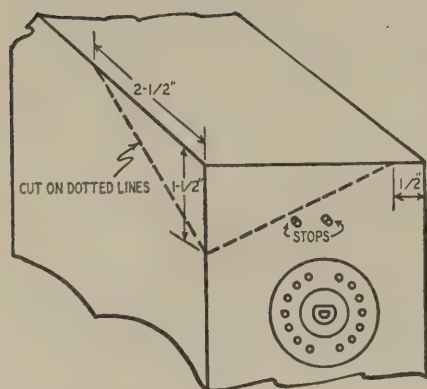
Sketch of the tuner enclosure, showing material that must be removed.
